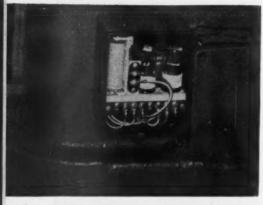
Dual electronic switch mounted to base of machine amplifies minute tolerance gage currents for operation of vacuum tube time delay relays in coolant and feed motor circuits. One tube is for rough and one for finish grind contact on gage.
